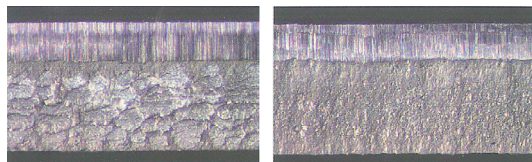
Sheet edge appearance for HR 700Y-MC, $t = 2$ mm with different cutting conditions. The left image indicates that cutting clearance and/or shearing angle is too large. The right image indicates that the cutting conditions are OK.
